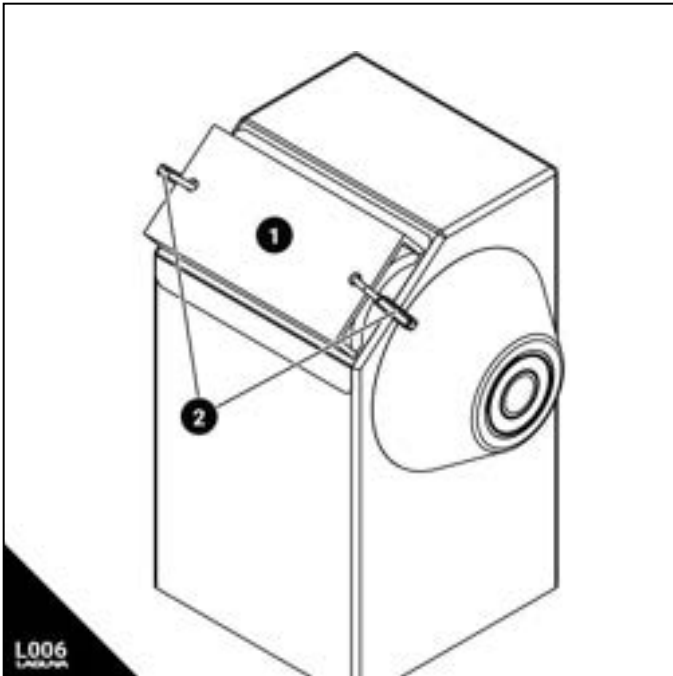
Method of locking the Laguna Revo Lathe. (1) Constructed 3 side box with padlock holes. (2) Padlocks.
